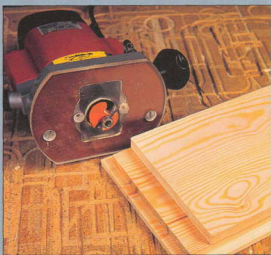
A rebated drawer front and the drawer side with width equal to the raised portion of the front, together with the router fitted with a bearing-guided rebate cutter
